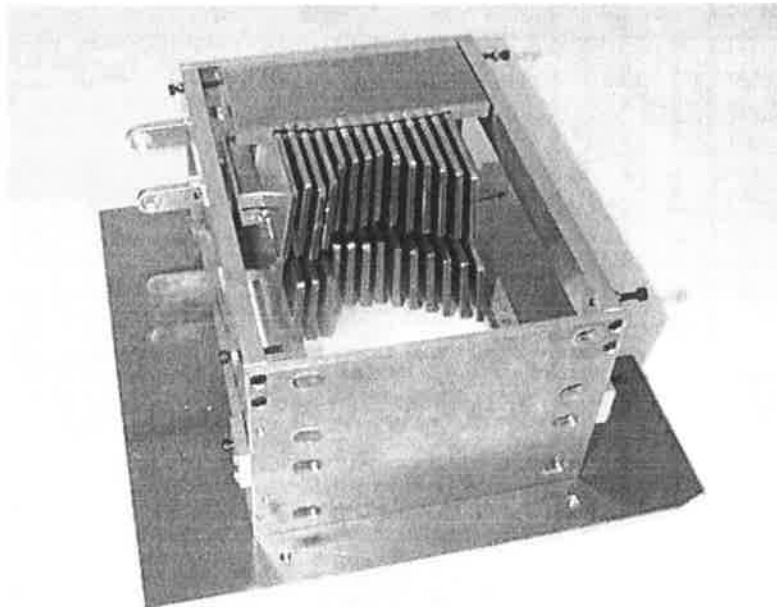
Picture taken of the prototype dual assembly MLC. The opposing leaf assemblies have been removed for clarity.
